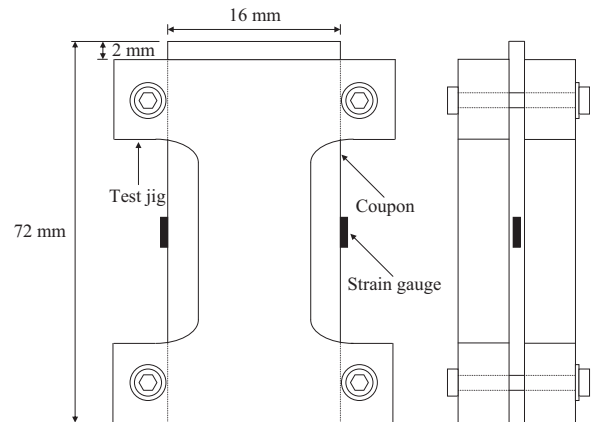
Compressive coupon testing jig and nominal coupon dimensions.
